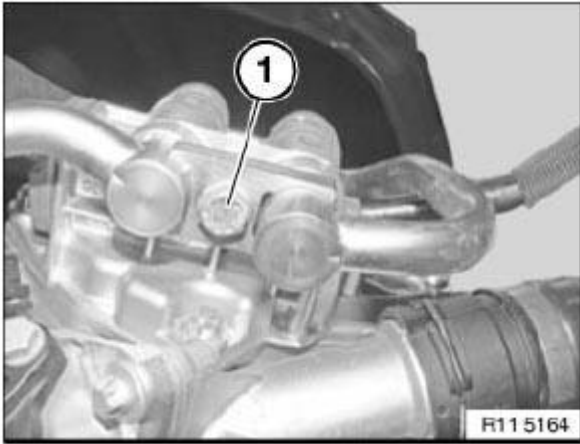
Identifying Engine Oil Pipe Mounting Bolt
